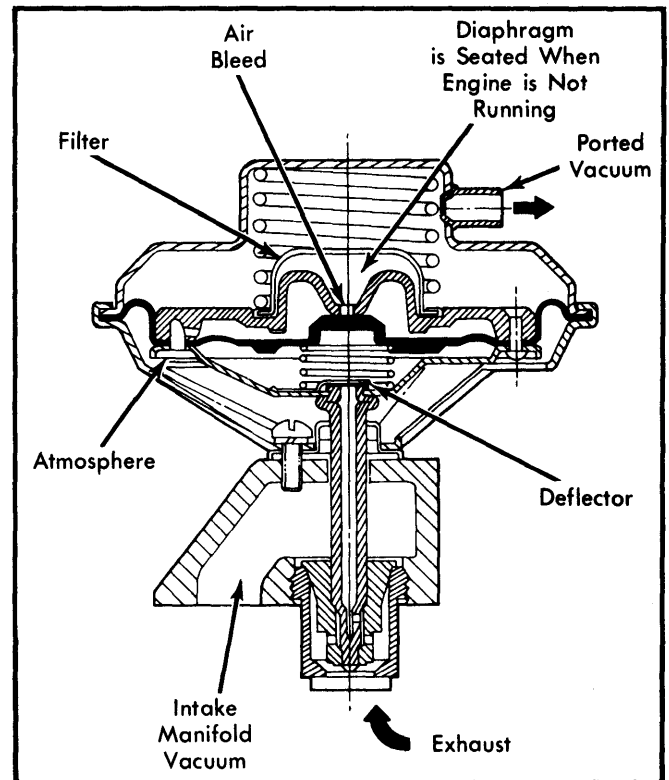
Cutaway View of Negative Transducer Back Pressure EGR Valve
